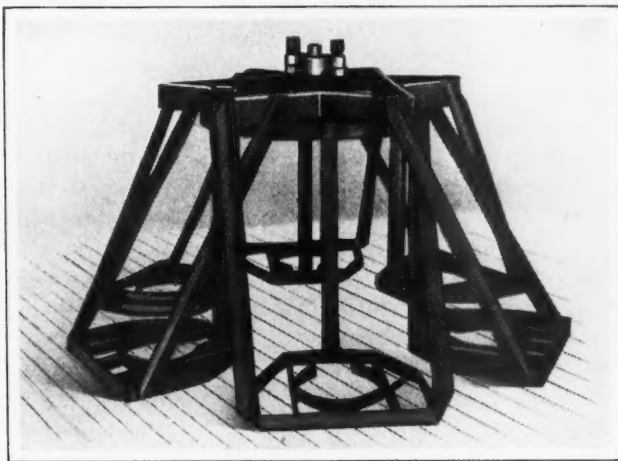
Welded Steel Holder Used in Machine Shown in Figs. 1 and 2
